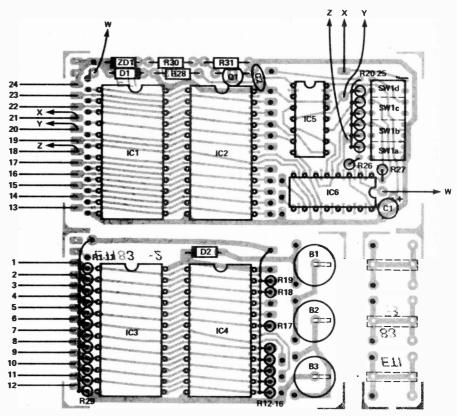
Component overlay for the PseudoROM. Remember to separate the three boards before soldering!
